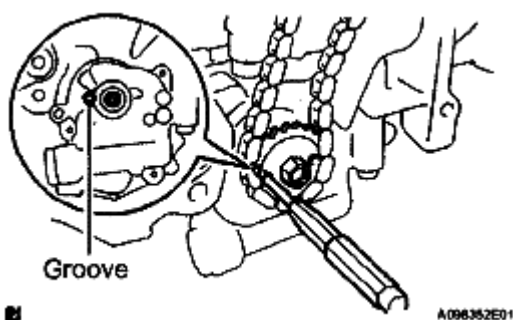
Inserting Bar Into Adjusting Hole Of Oil Pump Drive Shaft Sprocket
